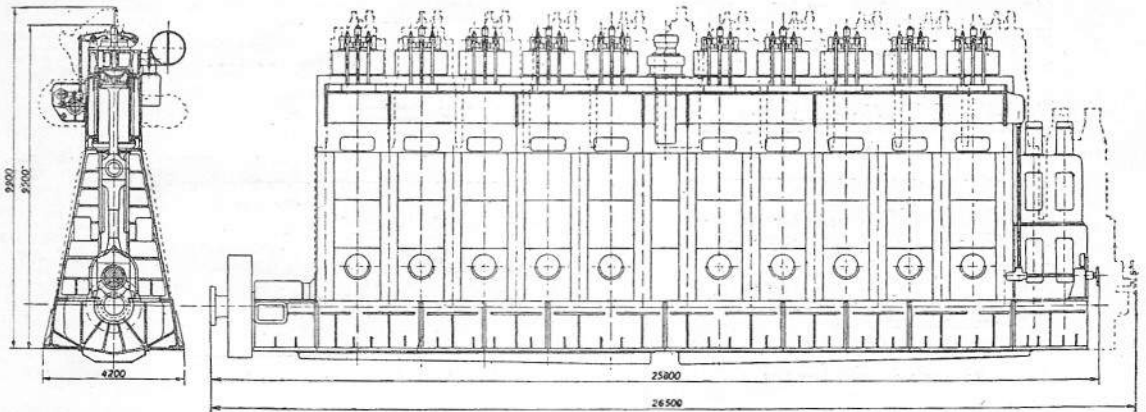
9,000 s.h.p. four-stroke single-acting pressure-charged engine.
